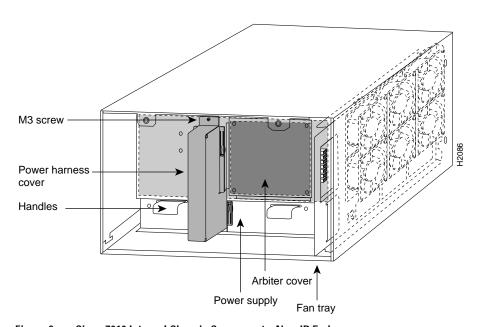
Cisco 7010 Internal Chassis Components, Non-IP End
